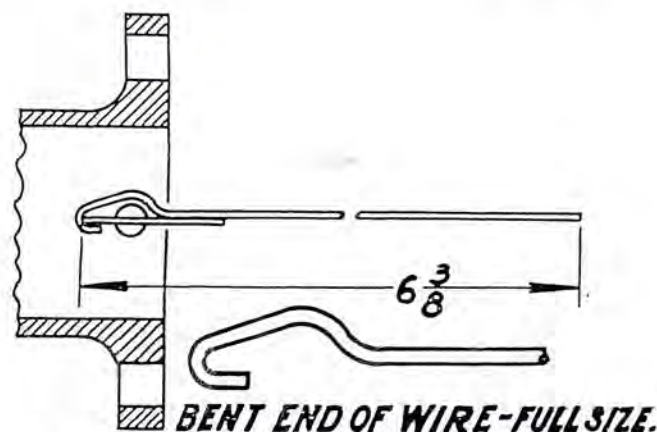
Testing Spring of Carburetor Automatic Throttle.
